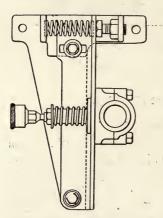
Barker Propeller Shaft used on the Bethlehem Trucks. shaft in one of the slots of a pivoted arm. A coil spring on the shank of the bearing, which passes through the slot in the arm, slightly resists free movement of the shaft away from the arm, and another coil spring at the top of the arm acts similar in the opposite direction, the arm being pivoted at the lower end. This pivot arm is supported by a bracket attached to a cross member of the frame.
